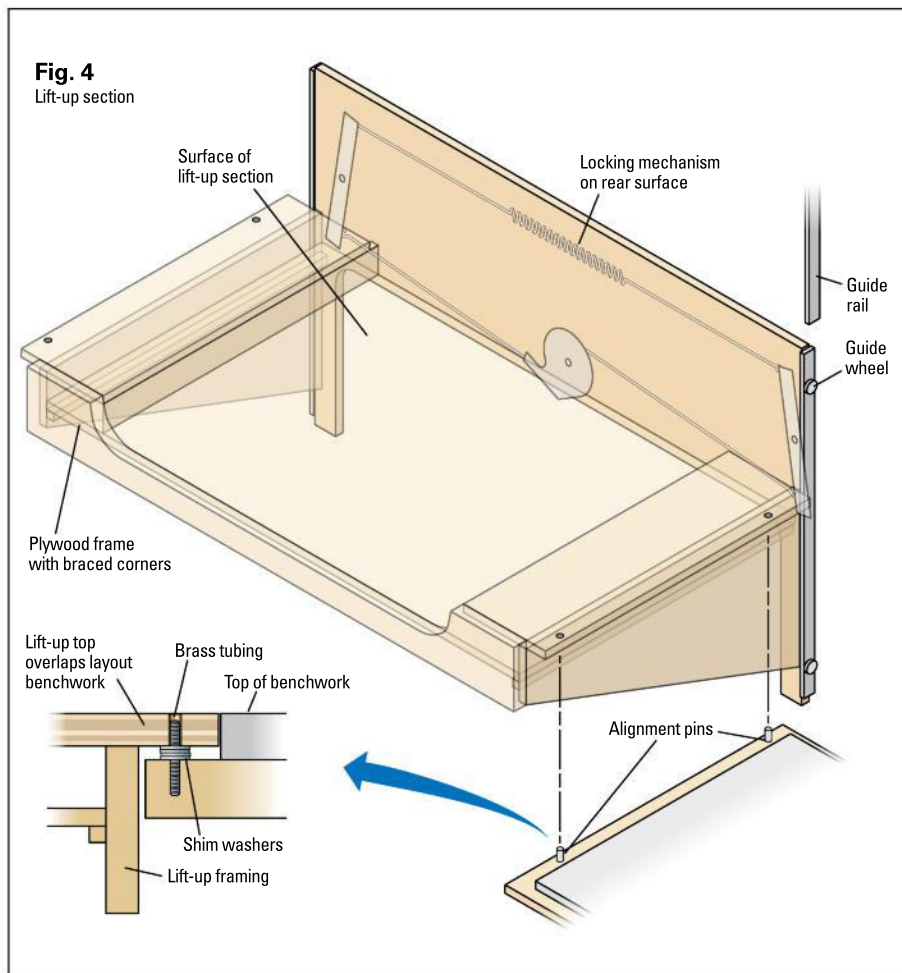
Lift-up section. The lift-up section is assembled from plywood with 1 x 1 pine blocking in the corners. The parts are glued and screwed together to ensure a sturdy structure. Illustrations by Rick Johnson
